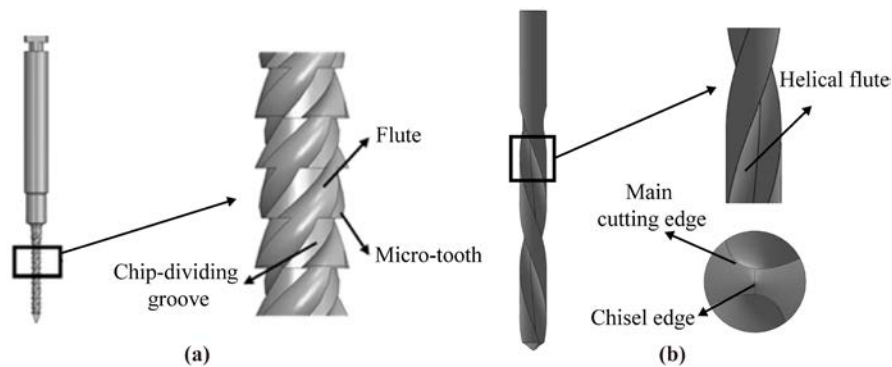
Geometric structure of cutting tools. (a) Drill-milling tool. (b) Medical twist drill.
